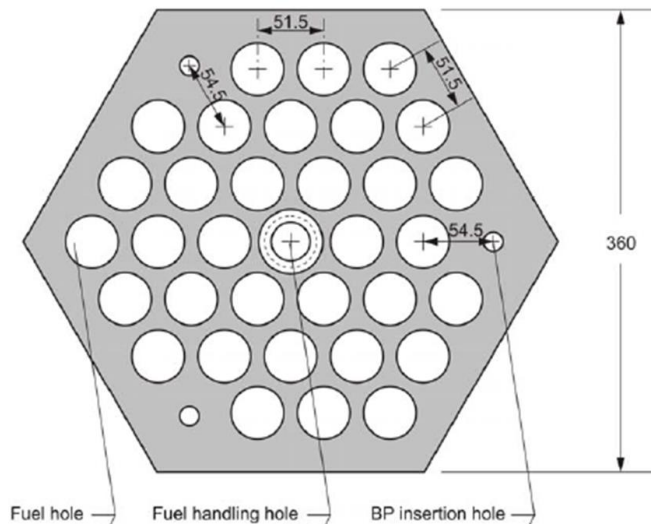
Configuration of fuel assembly (33 fuel holes).
